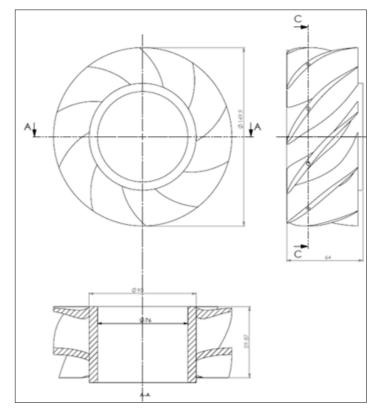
The main overall dimensions of the turbine rotor (material POM-H)
